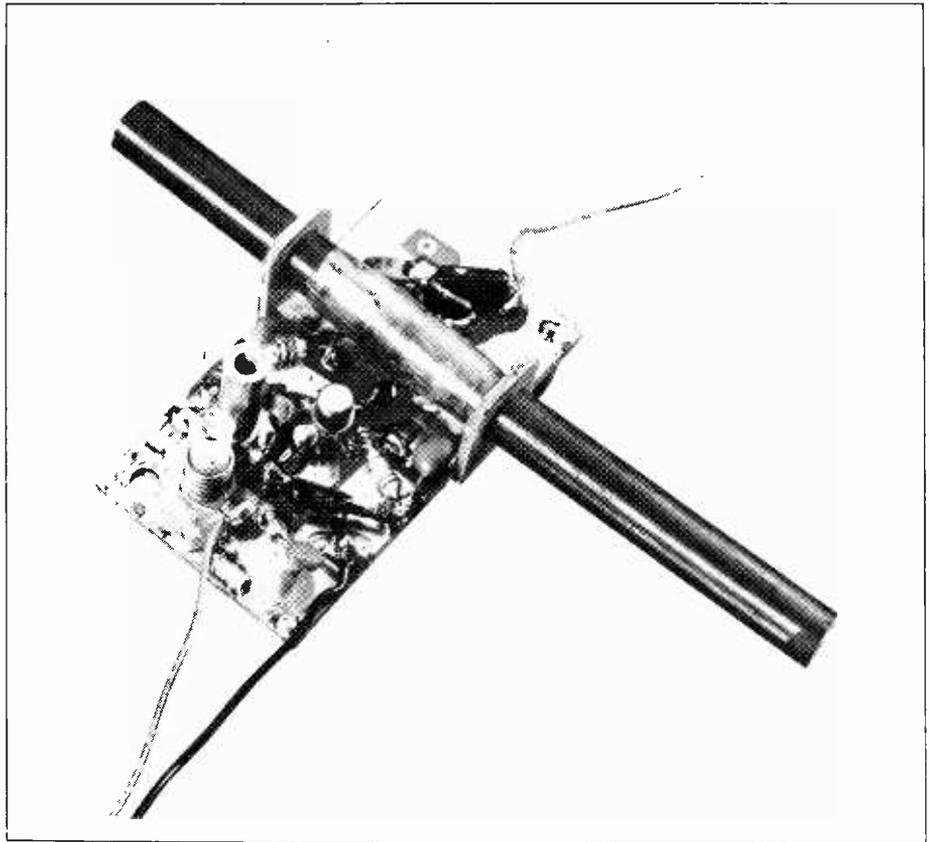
The complete ferrite aerial unit mounted on a printed circuit board.
